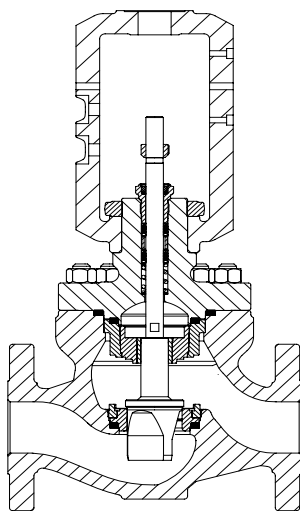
Type 251GR Globe Valve operated with screwed-in seat
